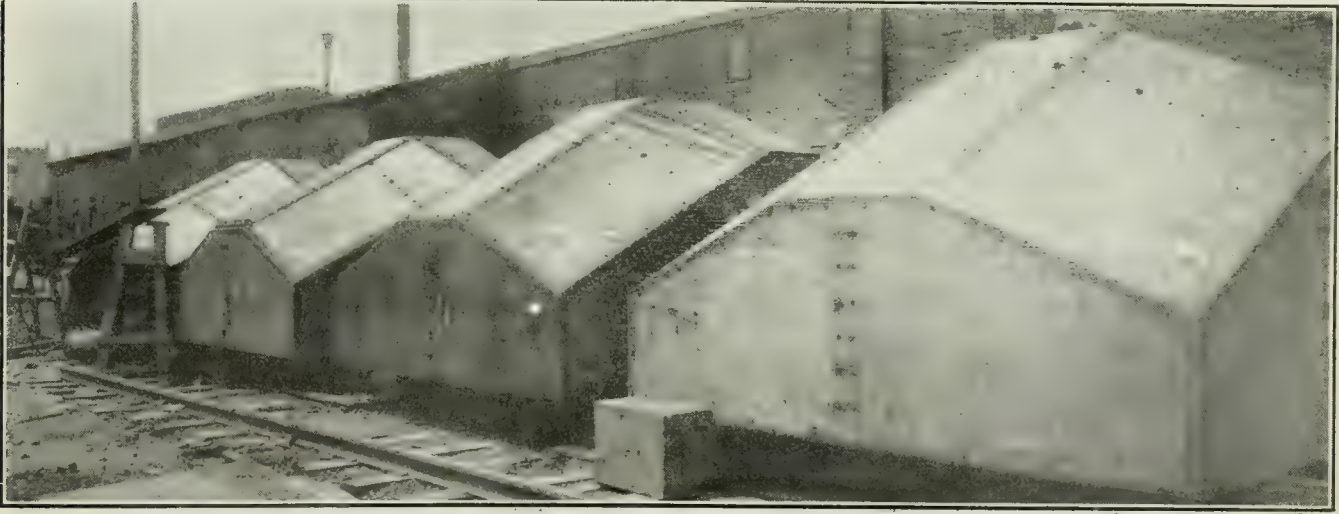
THIS SHOWS SOME OF THE TANKS THAT WERE WELDED BY THE ELECTRIC ARC PROCESS.
